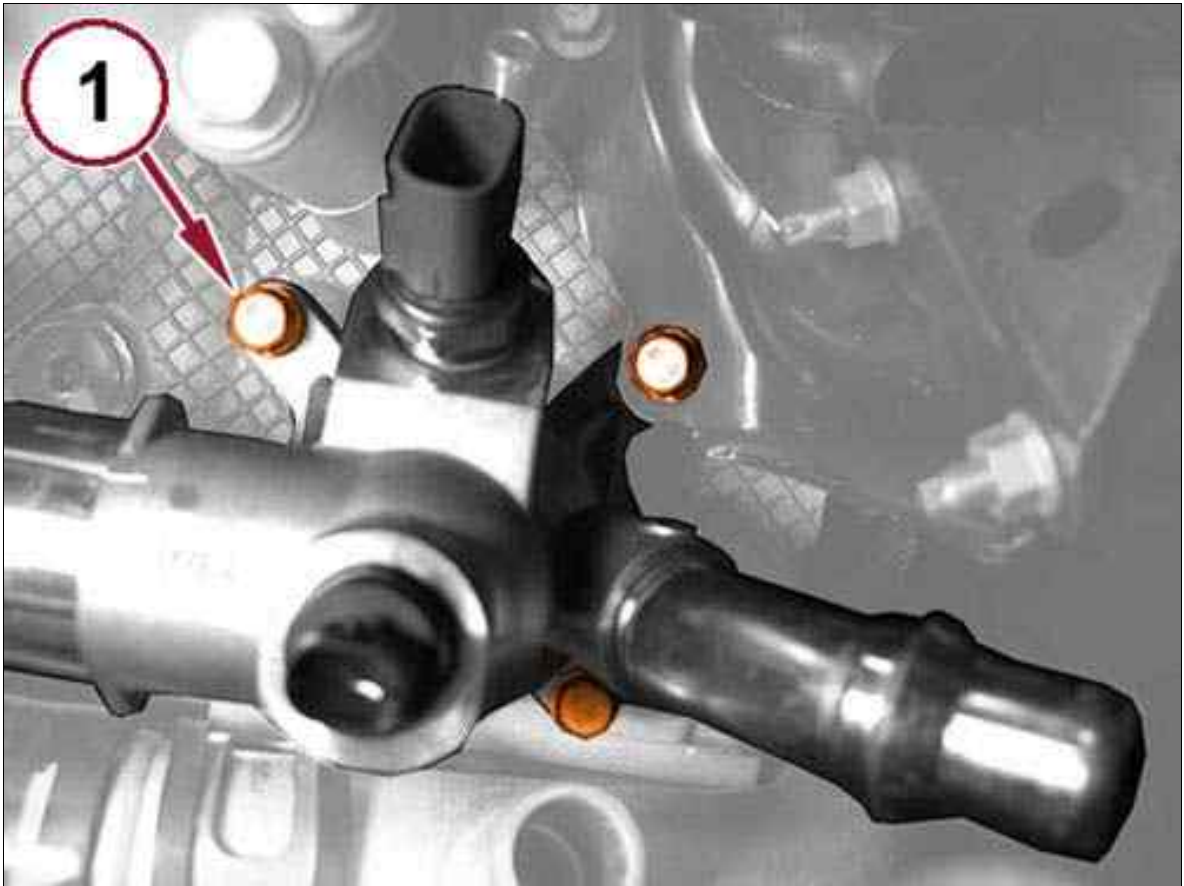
Coolant Tube To Thermostat Housing Lock Tab & Bolt
